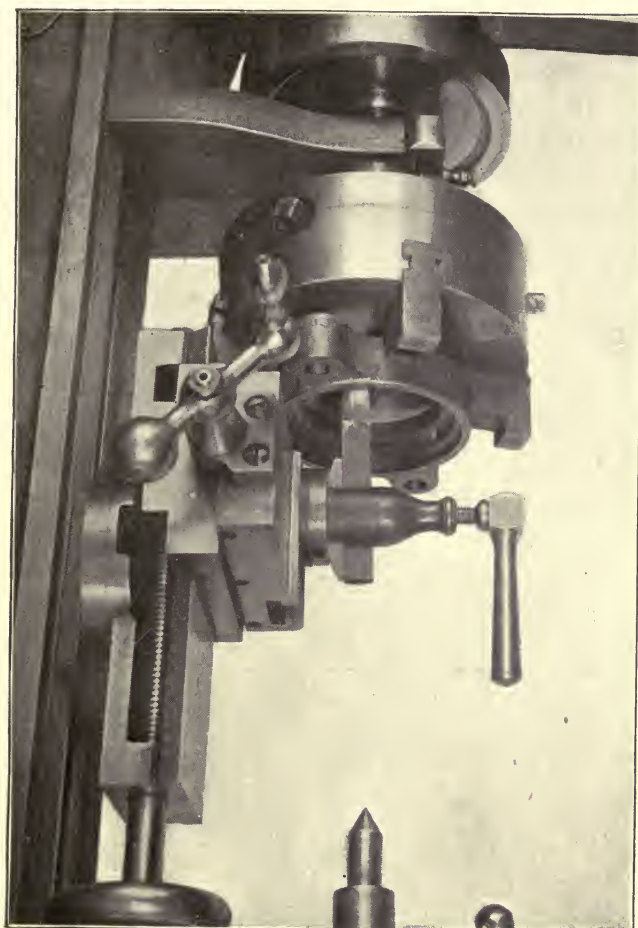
BORING CYLINDER COLLAR TO FIT CYLINDER AND WATER JACKET TUBES.
